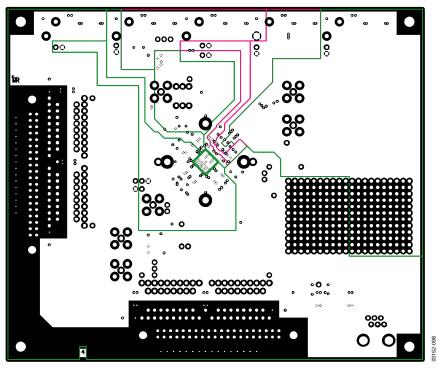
PCB Assembly, Layer 4 Metal (Power Plane), Rev F Evaluation Board
